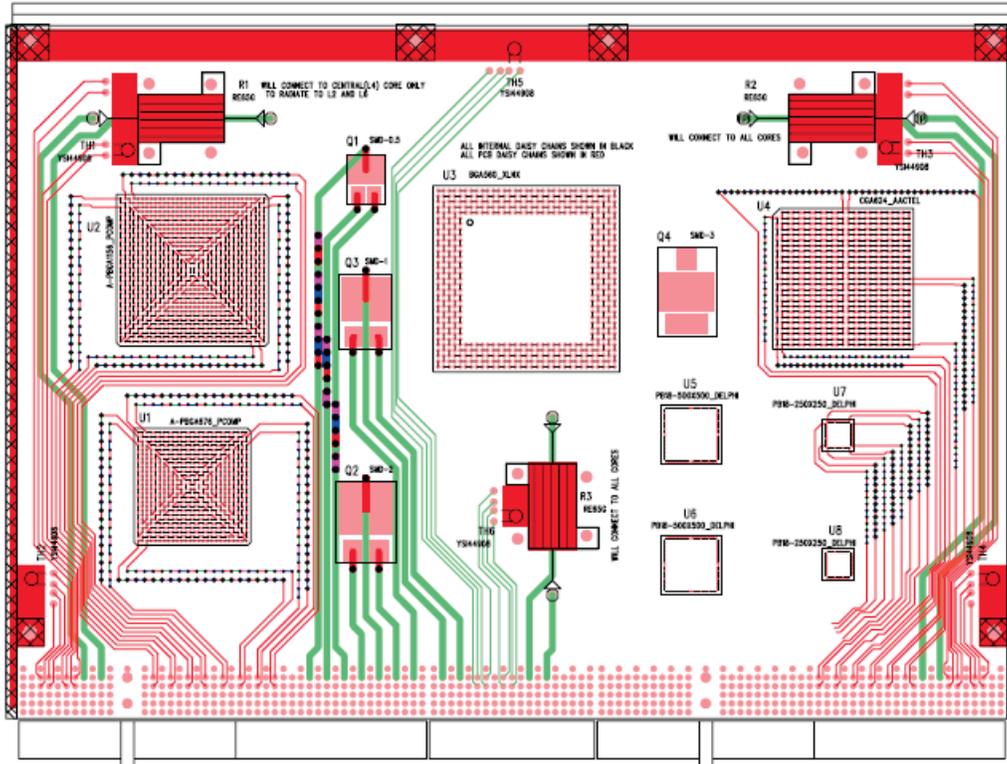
Drawing of the Top Side of Test Printed Circuit Board with Three 10-Watt Resistors R1, R2 and R3
